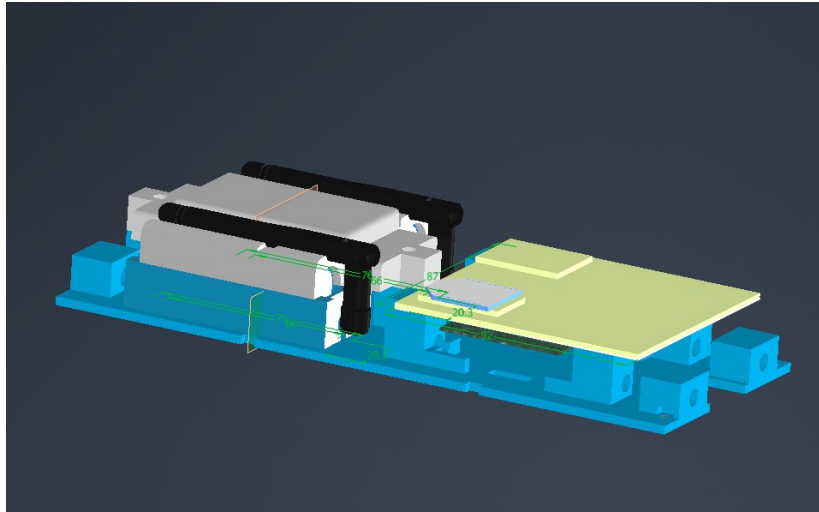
Avionics bay assembly: battery pack, holder, and electronics stack integrated. Authors' own fabrication.
